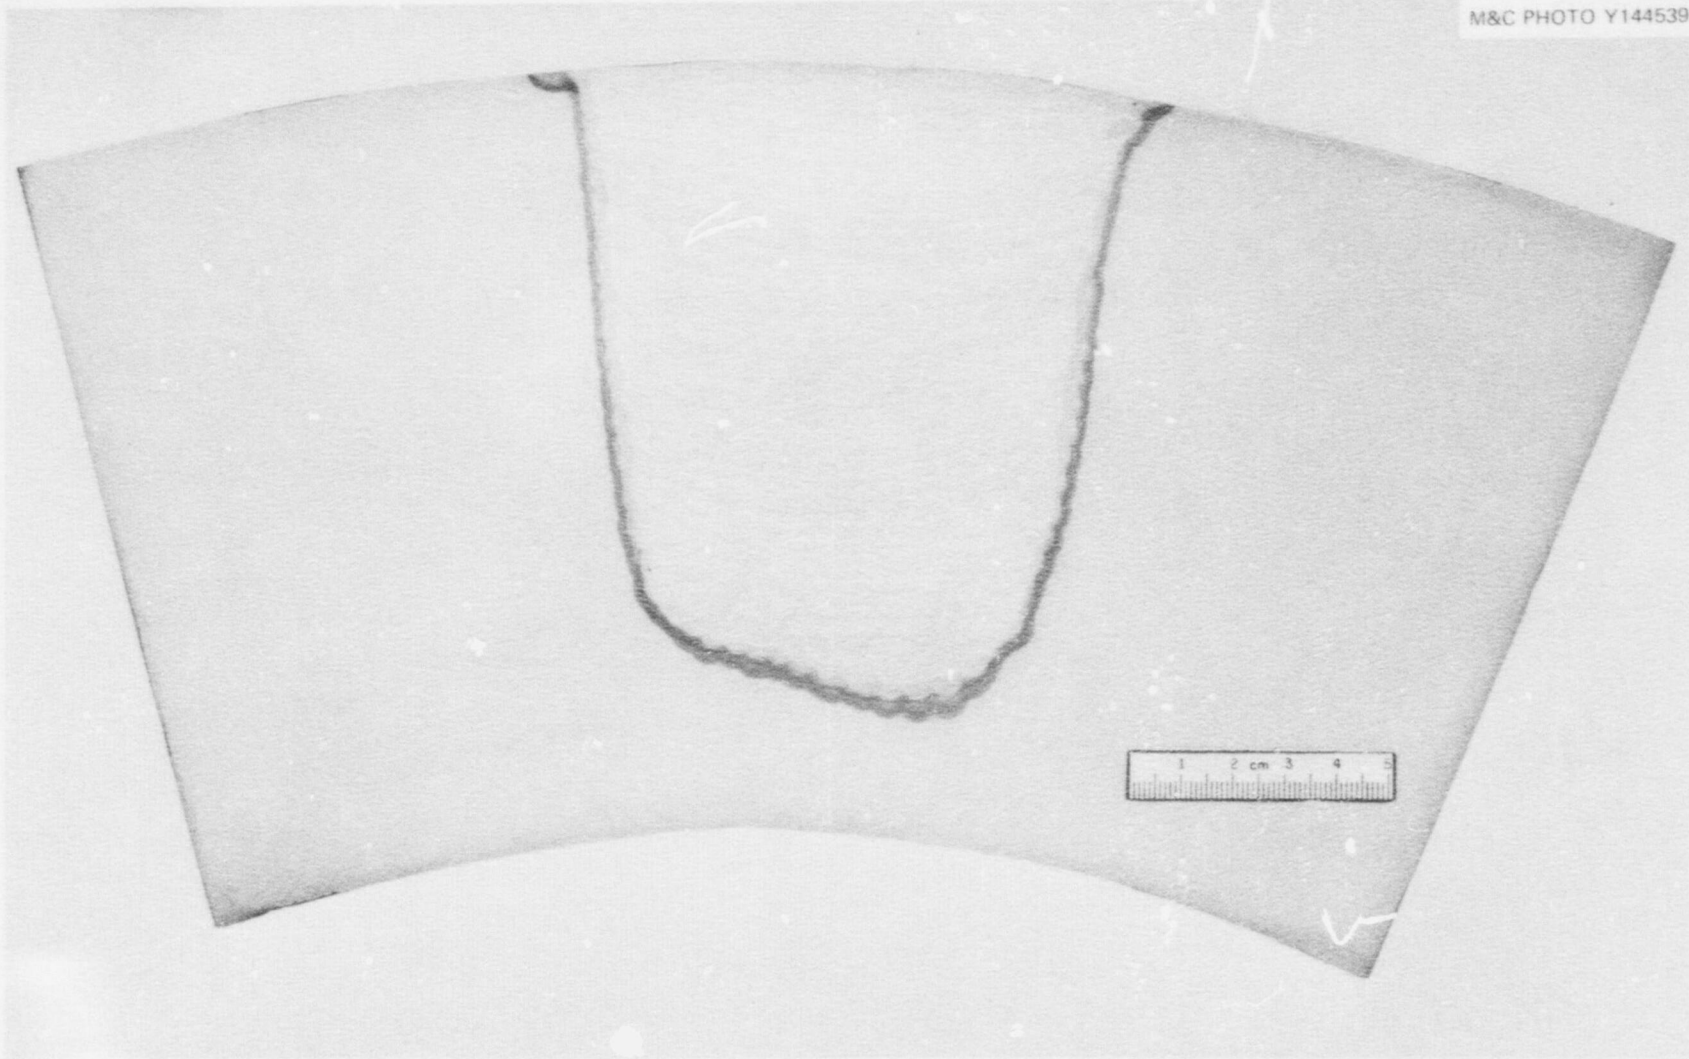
Cross section of the prototypical half-bead weld repair for vessel V-7B. The sides of the cavity in this piece are more irregular than in the vessel because the V-7B cavity was not machined.
